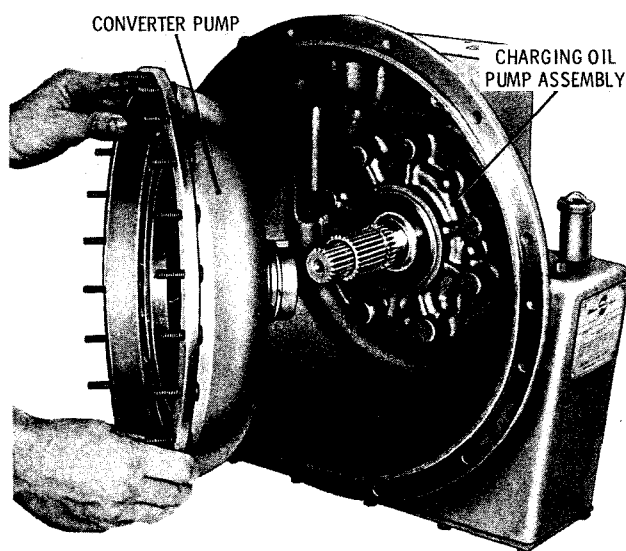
Removing converter pump assembly (TC 300) 51796
